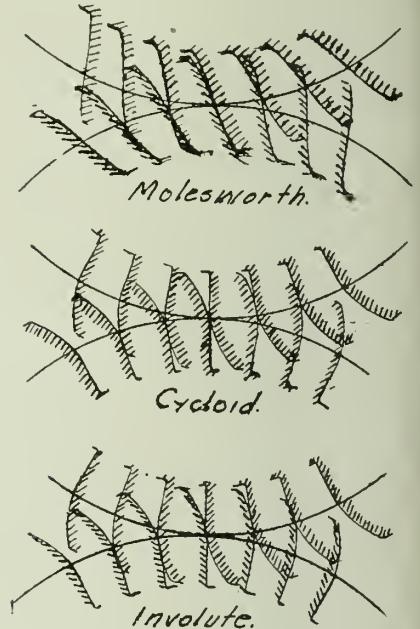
THREE OUTLINES OF GEAR TOOTH.
